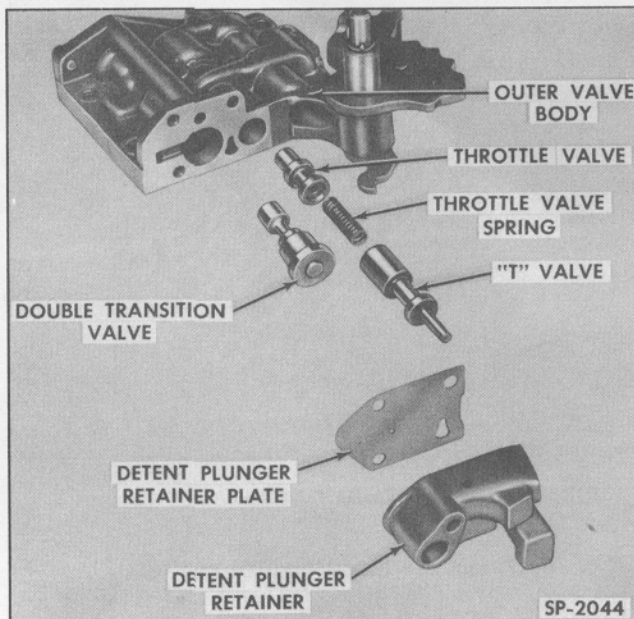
"T" Valve, Throttle Valve and Double Transition Valve
